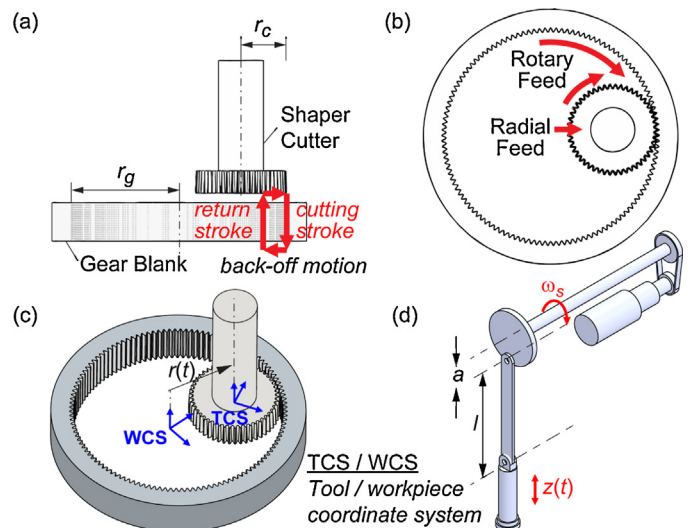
Principle movements and geometries in gear shaping: (a) Cutting, (b) feed movements, (c) shaping of an internal gear, (d) slider-crank.
